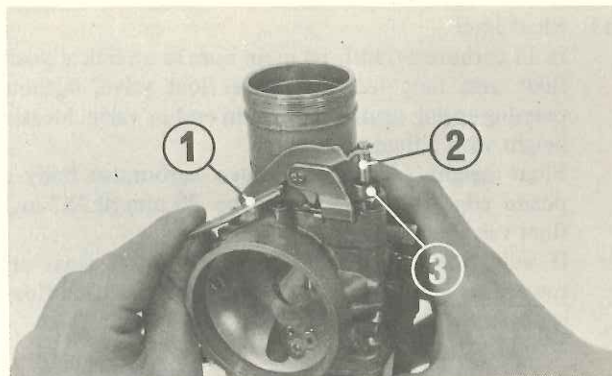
(1) Starter lever (2) Starter valve (3) Starter valve cap
